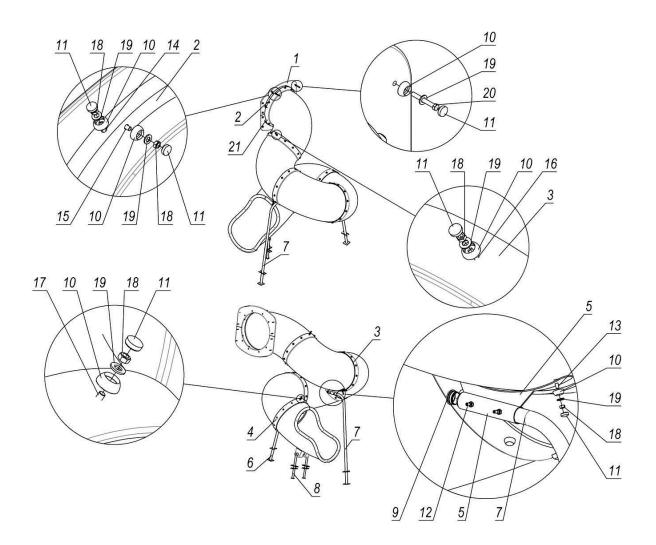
Place a spiral descent to one of the towers (platform height -1.5 m)
